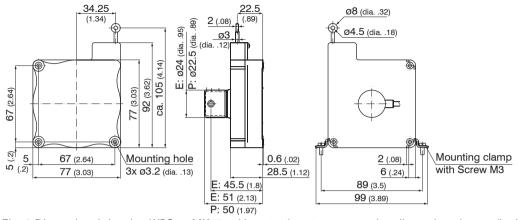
Dimensional drawing WPS-...-MK77, with potentiometer or encoder, dimensions in mm (inches), not to scale
